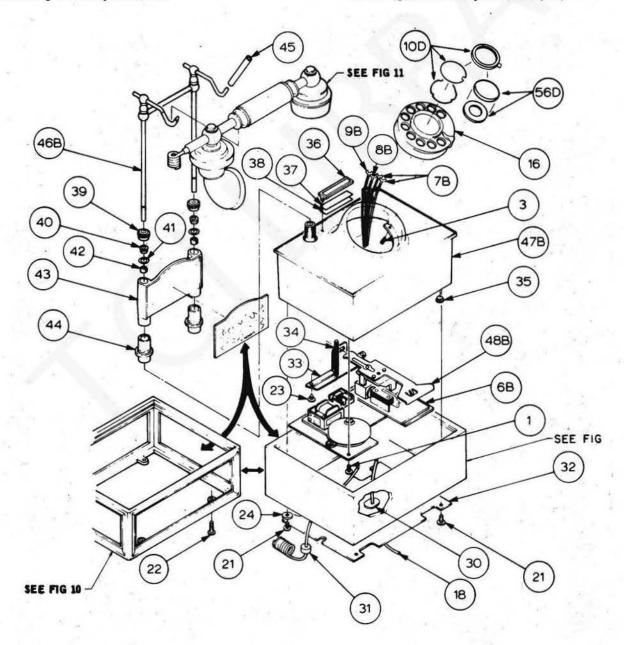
QSK400-Type Cradlephone - Assembly of Parts (Table G)
